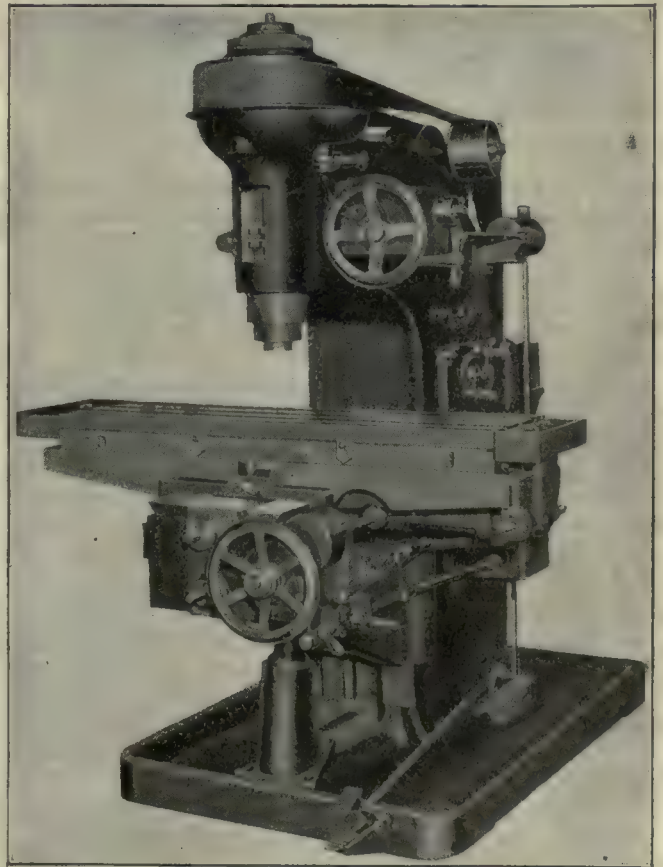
TOLEDO VERTICAL MILLING MACHINE, FRONT
